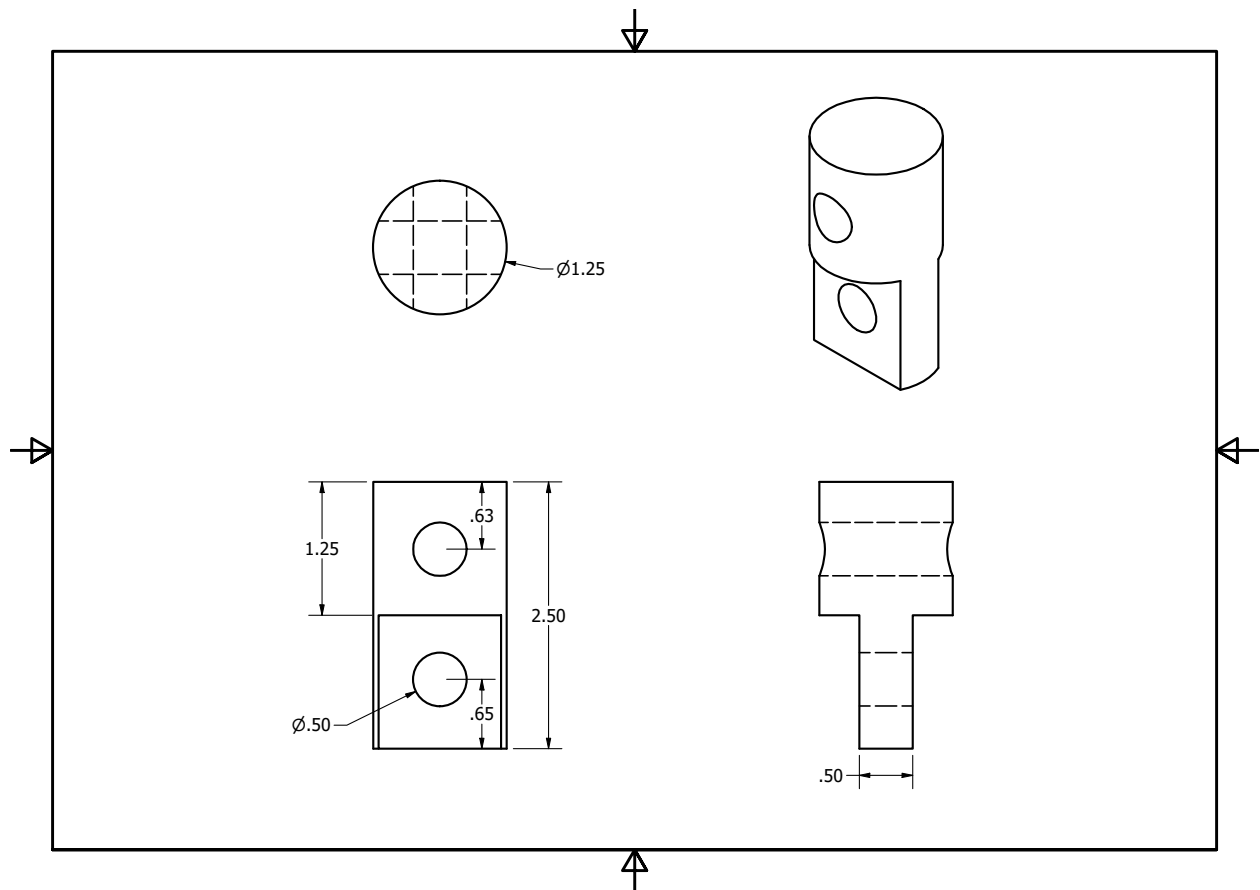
Dimensioned Drawing of Connection from Intron to Shear Apparatus
